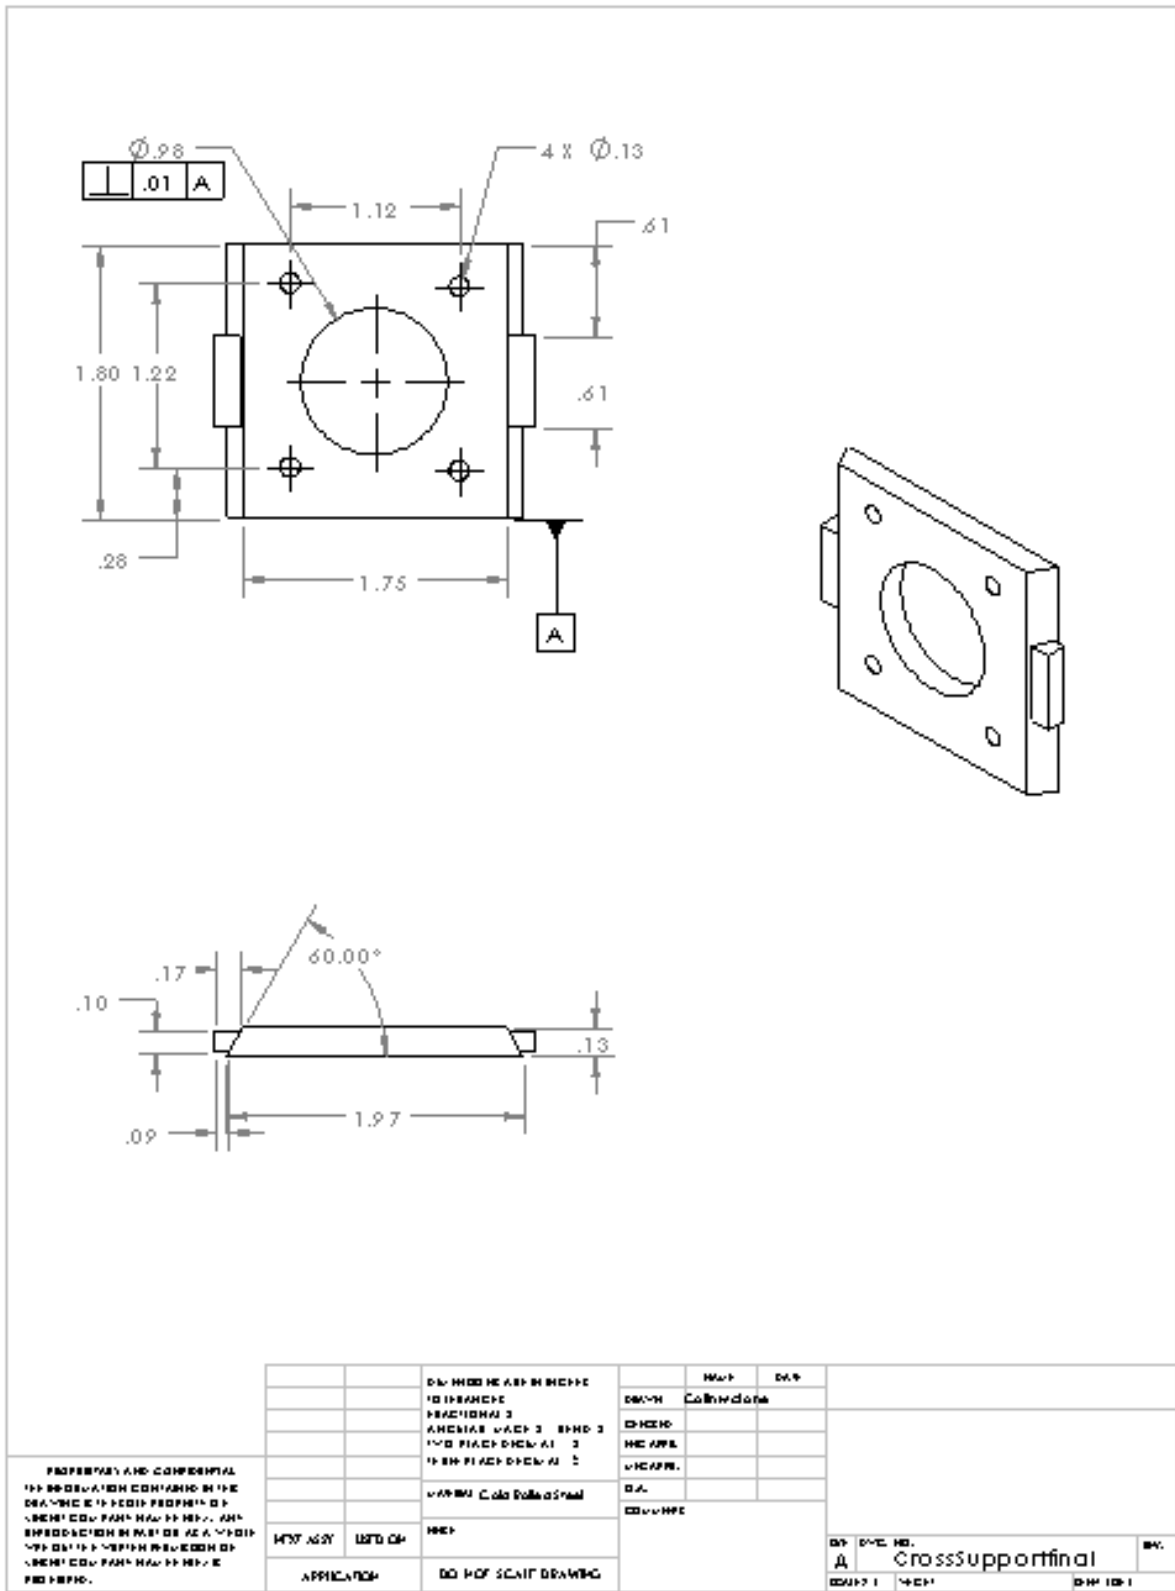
Dimensioned Drawing of Cross Support of New Design
